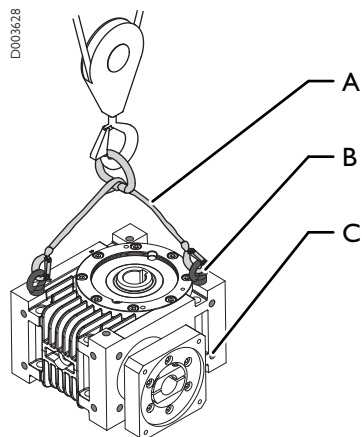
Attaching the slings: Güdel gearbox unit
